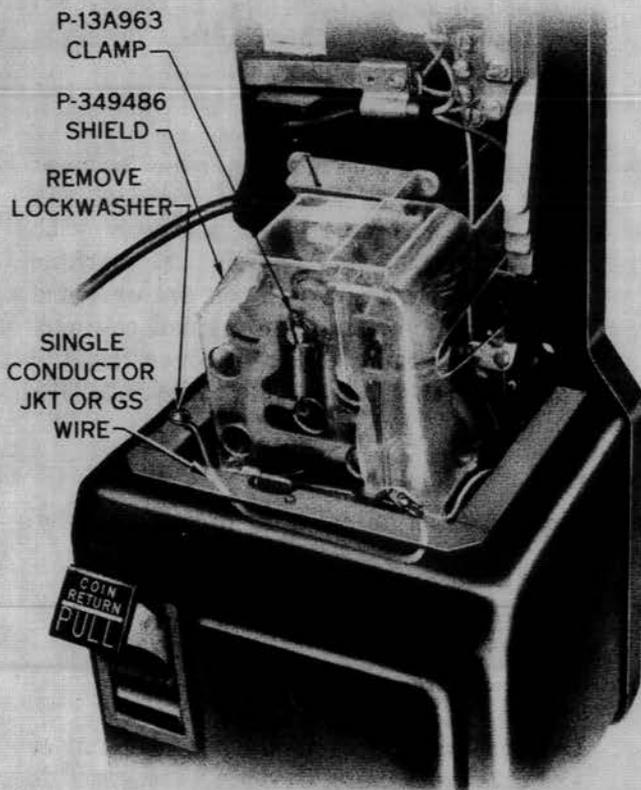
Method of Grounding Housing Assembly, Open Type Installation
